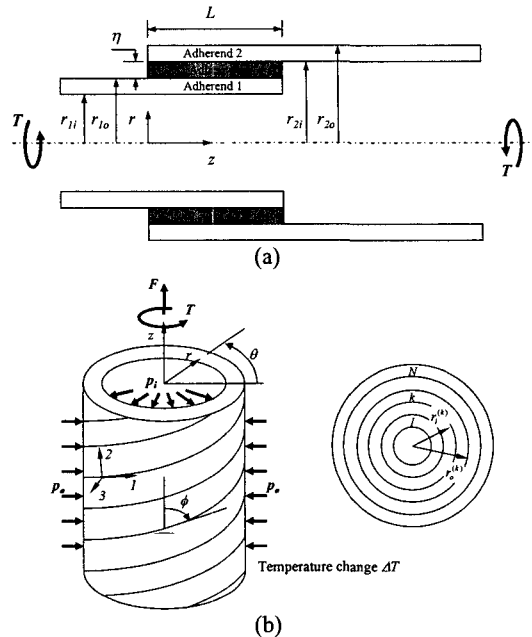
Geometric configuration: (a) tubular single lap adhesive joint and (b) laminated composite tube
